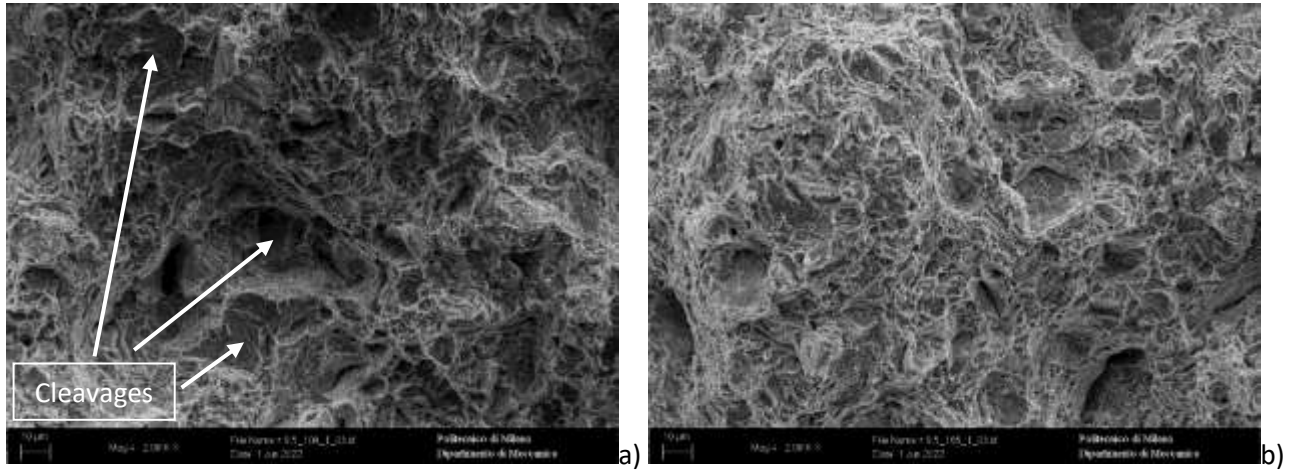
Fracture surfaces of 8.5 mm diameter samples. 100°C, 1h - Prevalently ductile fracture surface with some cleavage areas (a), 165°C, 1h – The fracture surface is almost completely ductile (b).
